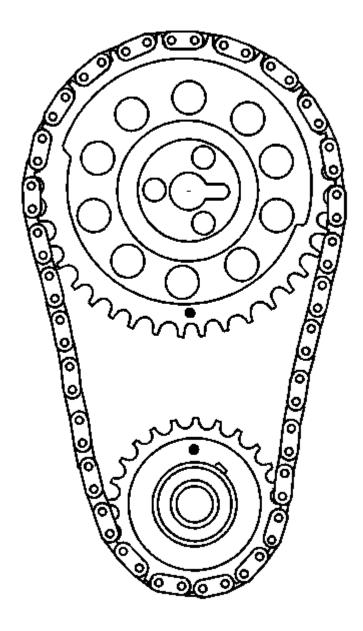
Ensuring Crankshaft Sprocket & Camshaft Sprocket Alignment Courtesy of GENERAL MOTORS CORP.
